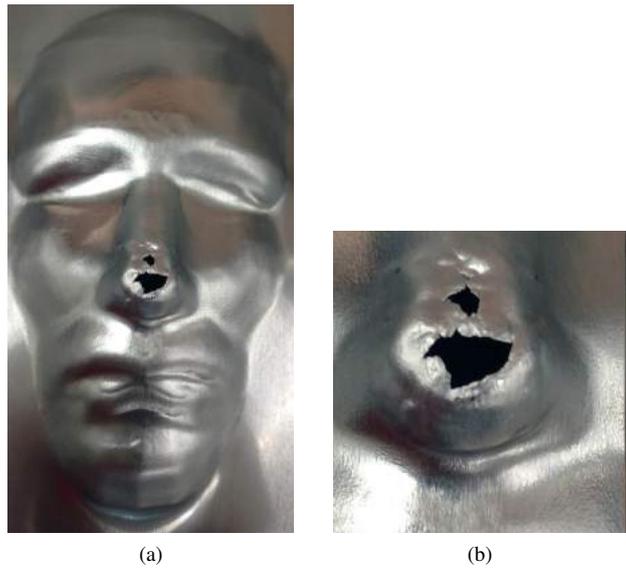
Test 04 (a) Final part (b) Detail of the fracture
